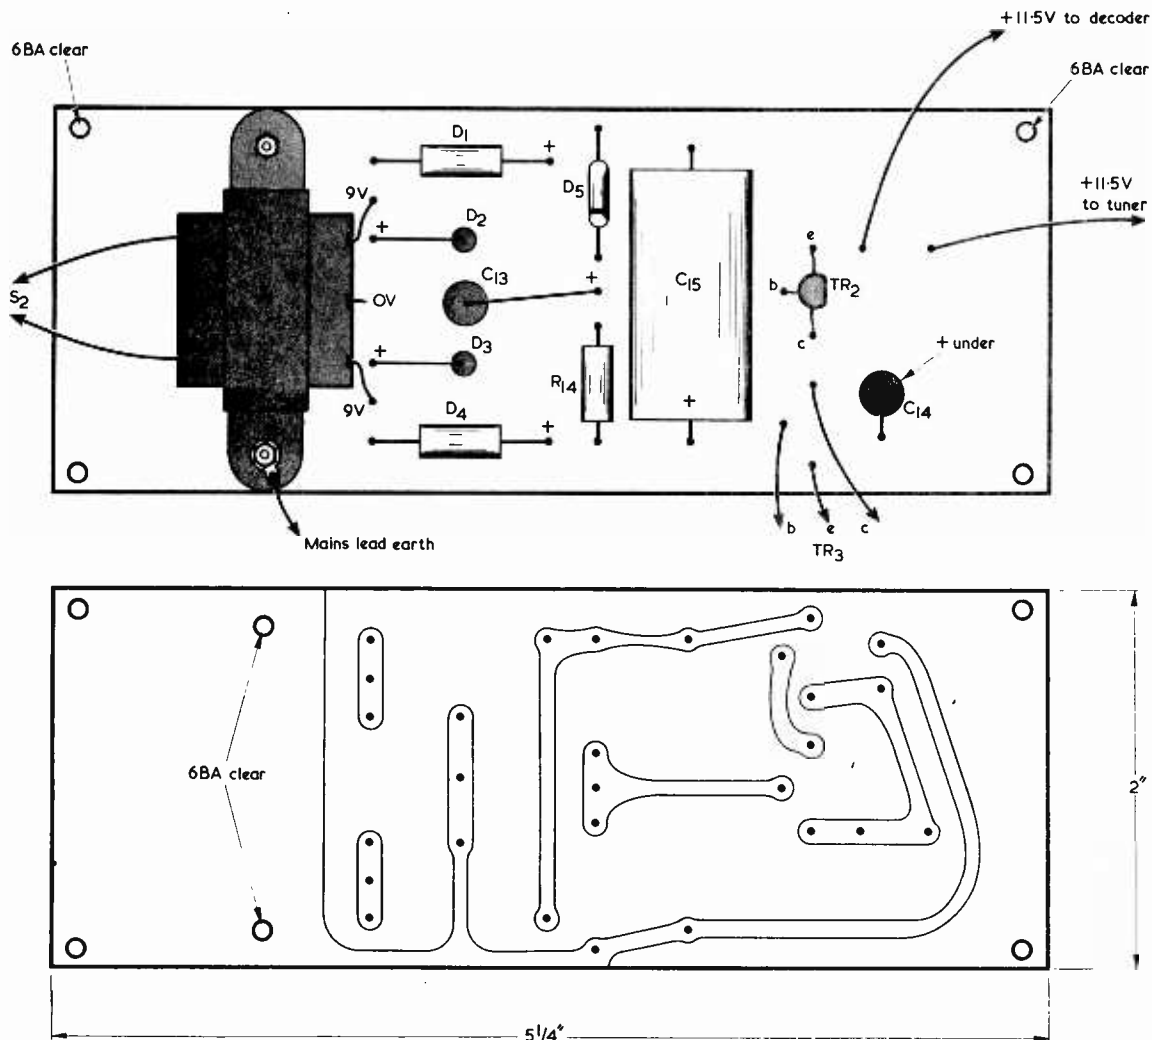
The component and copper sides of the power supply board. This is reproduced full size and the copper pattern may be traced
